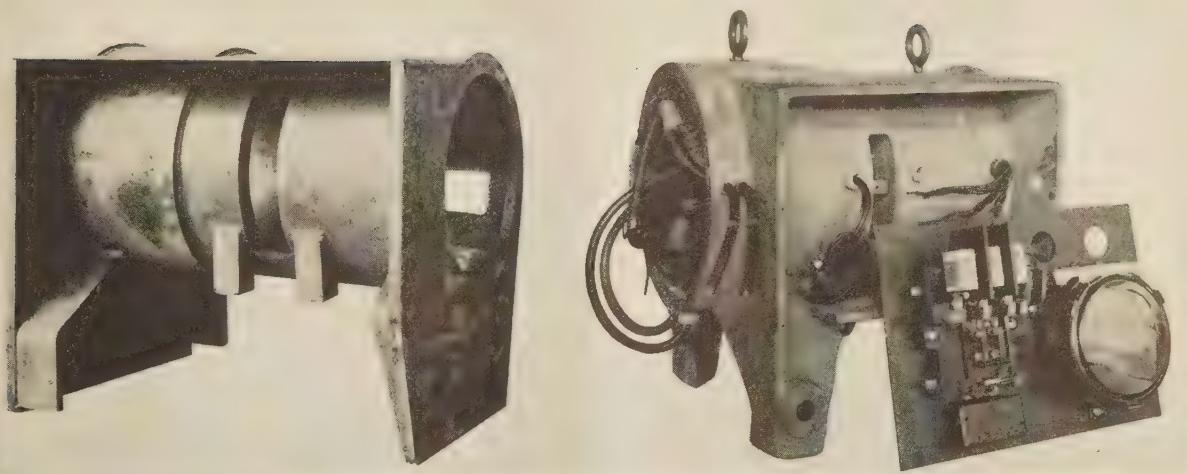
WELDED AND CAST ARC-WELDER FRAMES
